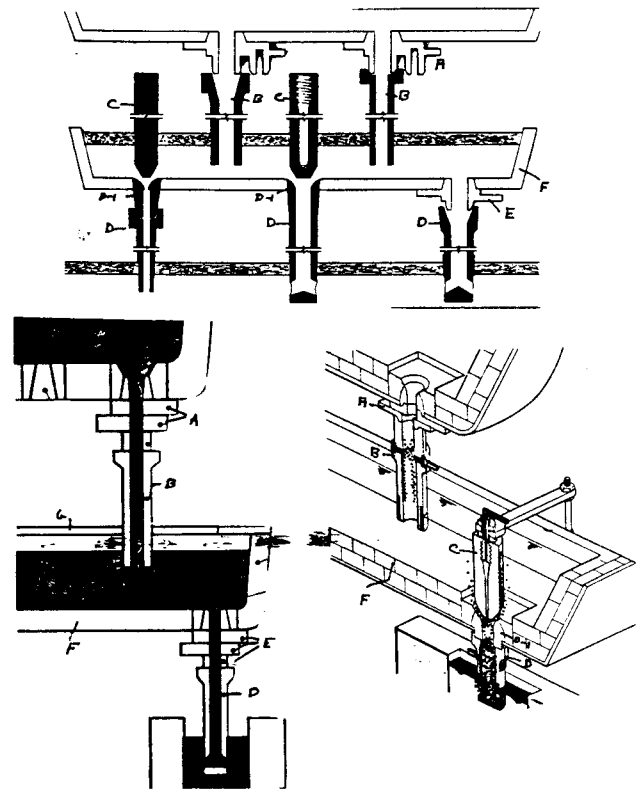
Typical refractory components in the ladle-to-mold system. A = ladle slide gates, B = ladle-to-tundish shrouds, C = tundish stopper rods, D = tundish-to-mold shrouds with associated nozzles (D-1), E = tundish slide gates, F = tundish linings, and G = tundish covers.
